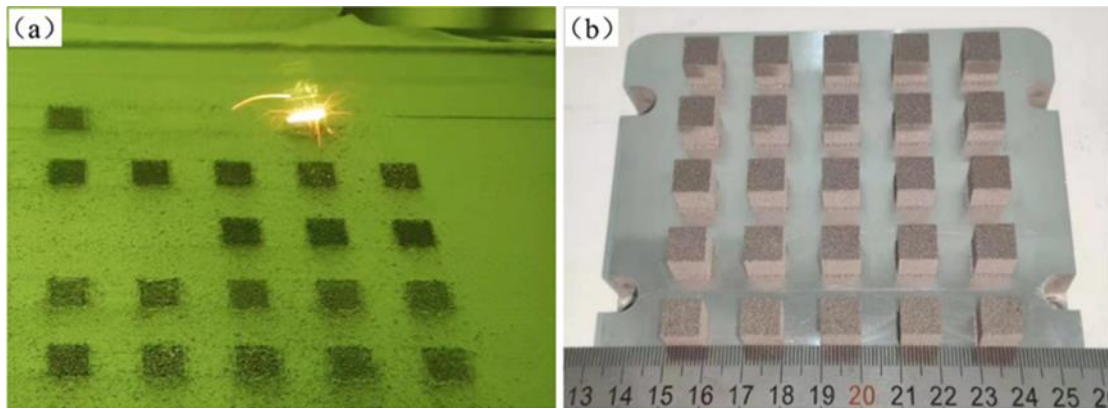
Part of the parameter forming diagram: (a) printing process; (b) Forming the specimen.
